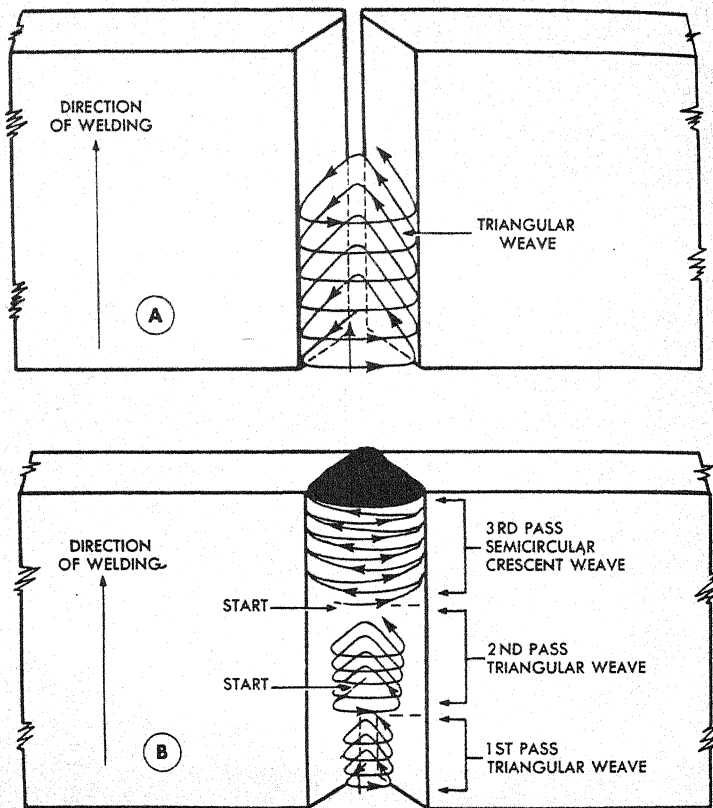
Welding a butt joint in the vertical direction with a triangular weave.
